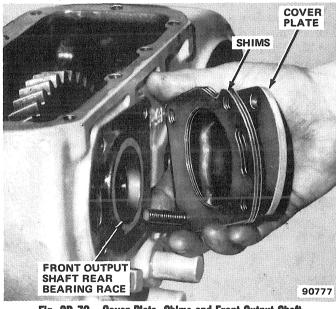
D-79 Cover Plate, Shims and Front Output Shaft Rear Bearing Race
